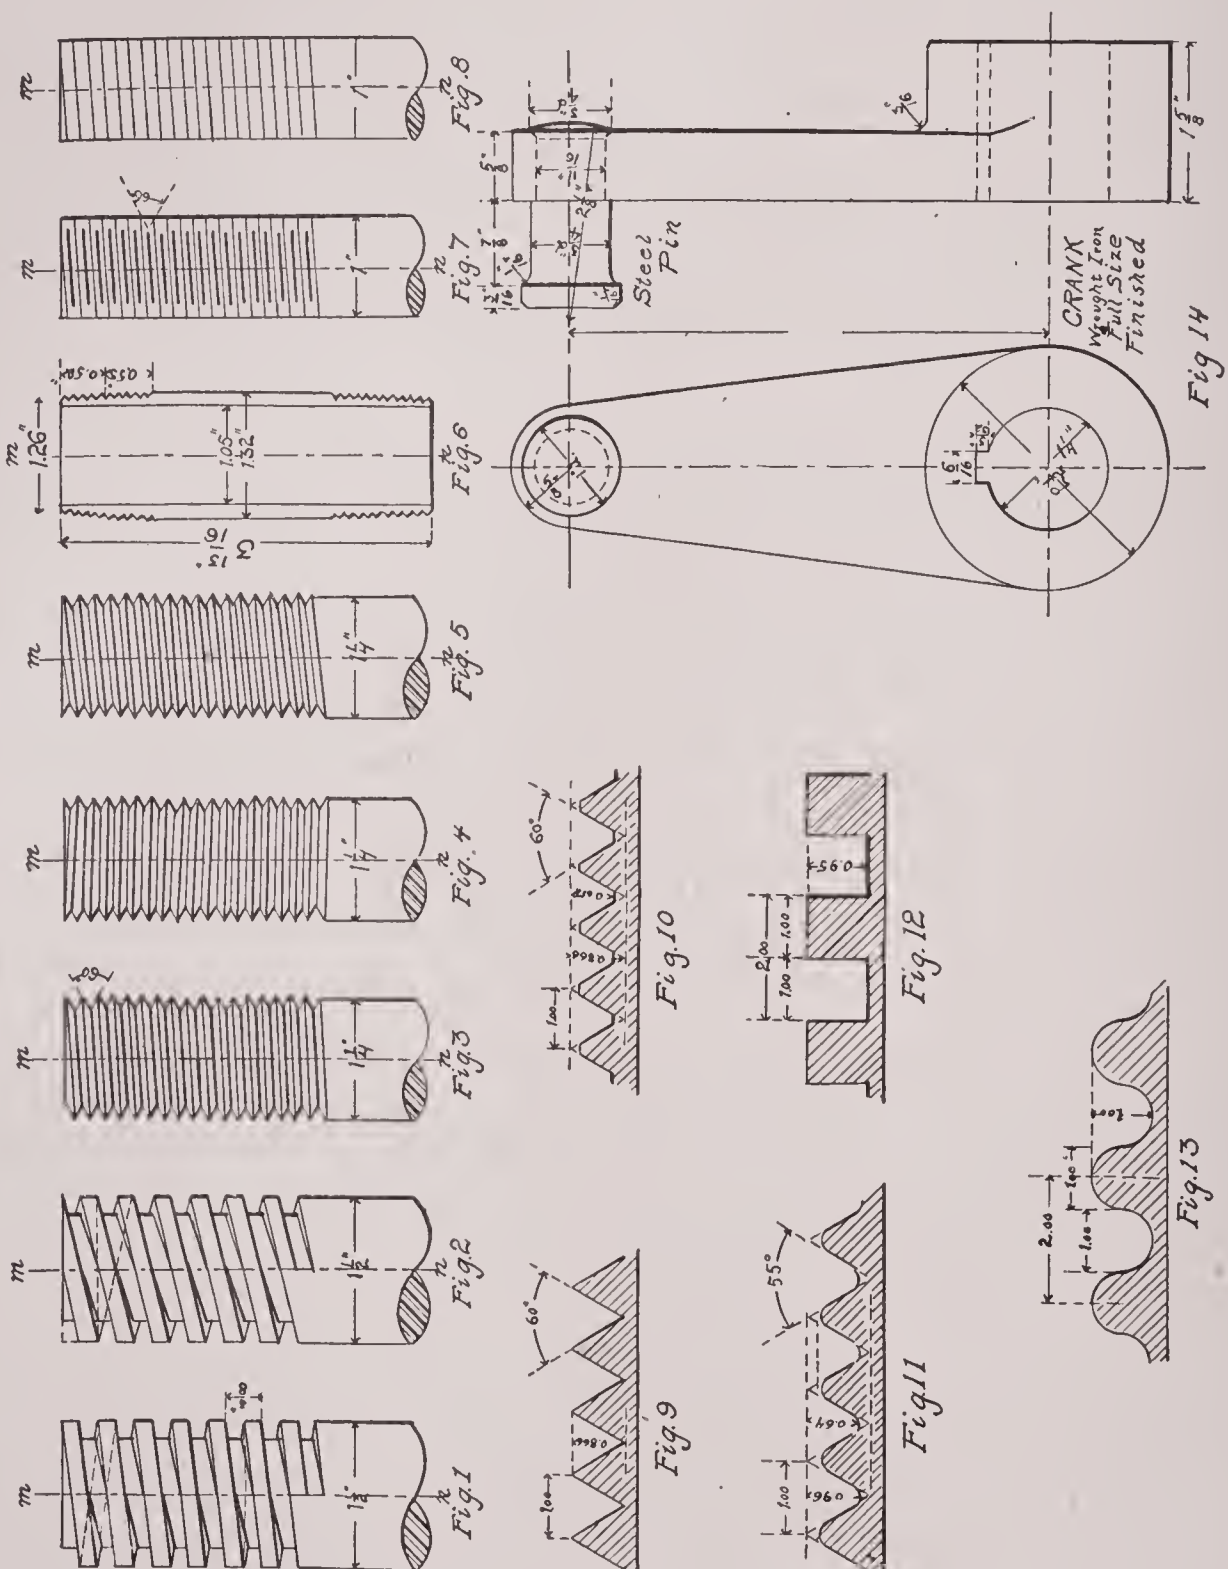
to 8 (Page 4012) show methods of drawing different kinds of screw-threads, or of representing simply that a part is threaded.
